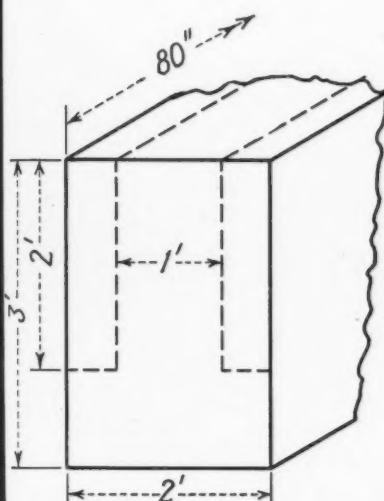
Low carbon steel generator poles with a carbon content between 5 and 15 points are successfully milled with carbide cutters despite the fact that high surface speeds are not available on planer type milling machines.
